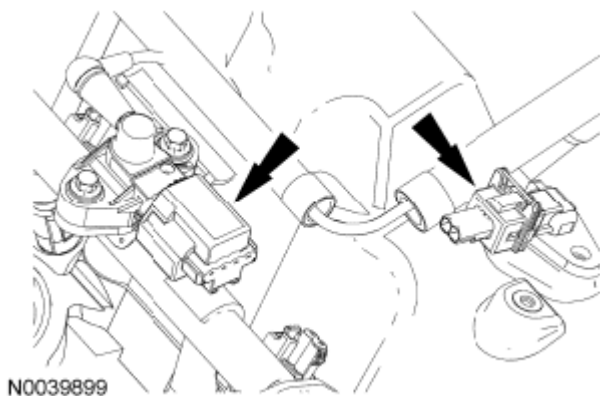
Locating Camshaft Position (CMP) Sensor Electrical Connectors
